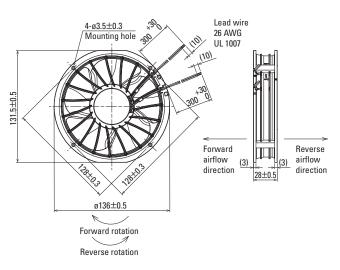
Dimensions of the San Ace 136RF 9RFA type (Unit: mm)
